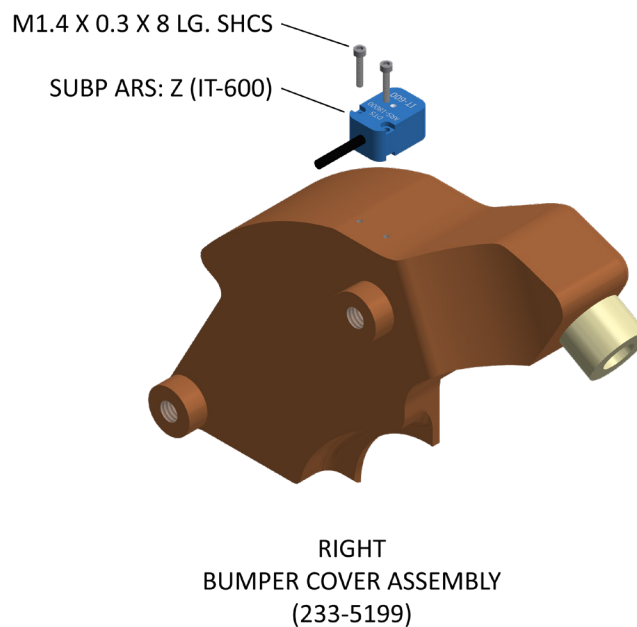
Attach the ARS to the Right Bumper Cover Assembly
